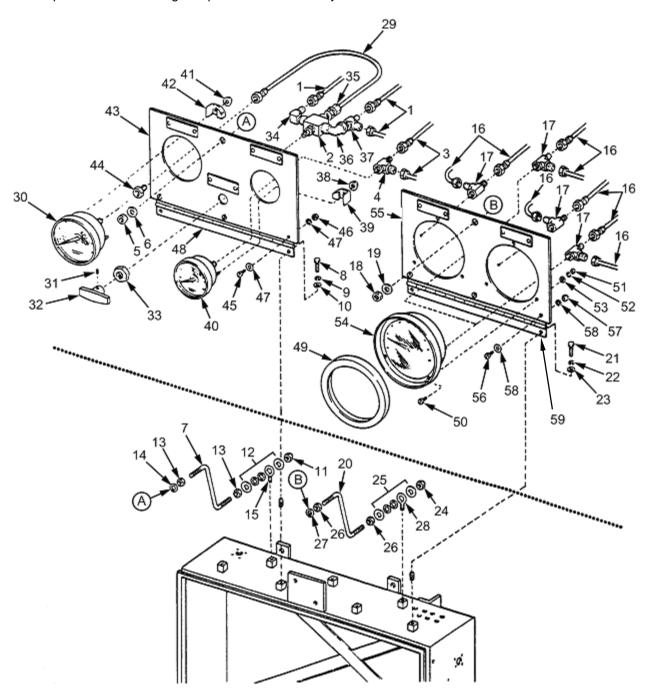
Pressure Gauges and Assemblies. (Model WTA-060 Only)
